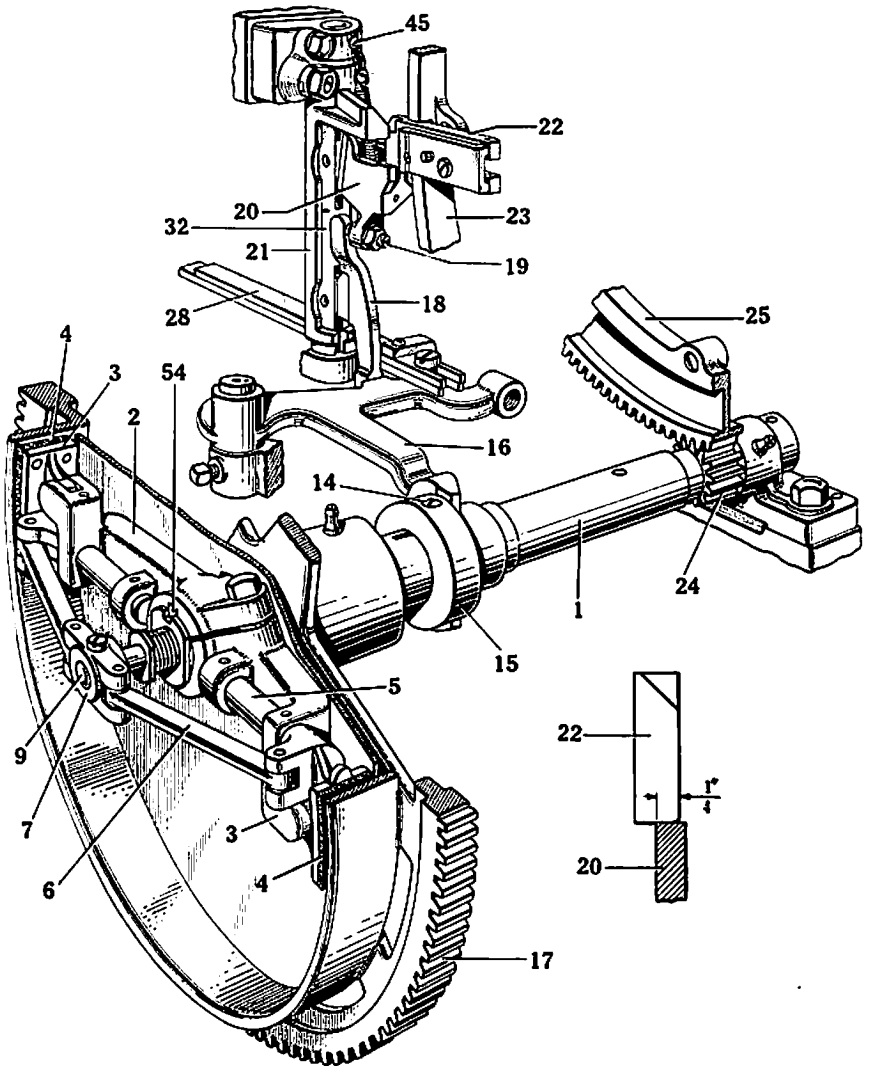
Driving Shaft Friction Clutch and Vertical Starting Lever in Assembly. The main drawing indicates how the automatic stopping pawl 22 in the delivery and elevator transfer cam 23 disengages the clutch by banking on the upper stopping lever 20. Pressure on the upper stopping lever causes the lower lever 18 to move the forked lever 16 against clutch flange 15. The flange moves the clutch rod 9 to the left and draws buffers 4 away from the driving pulley 17, thereby stopping the cams in normal position.
